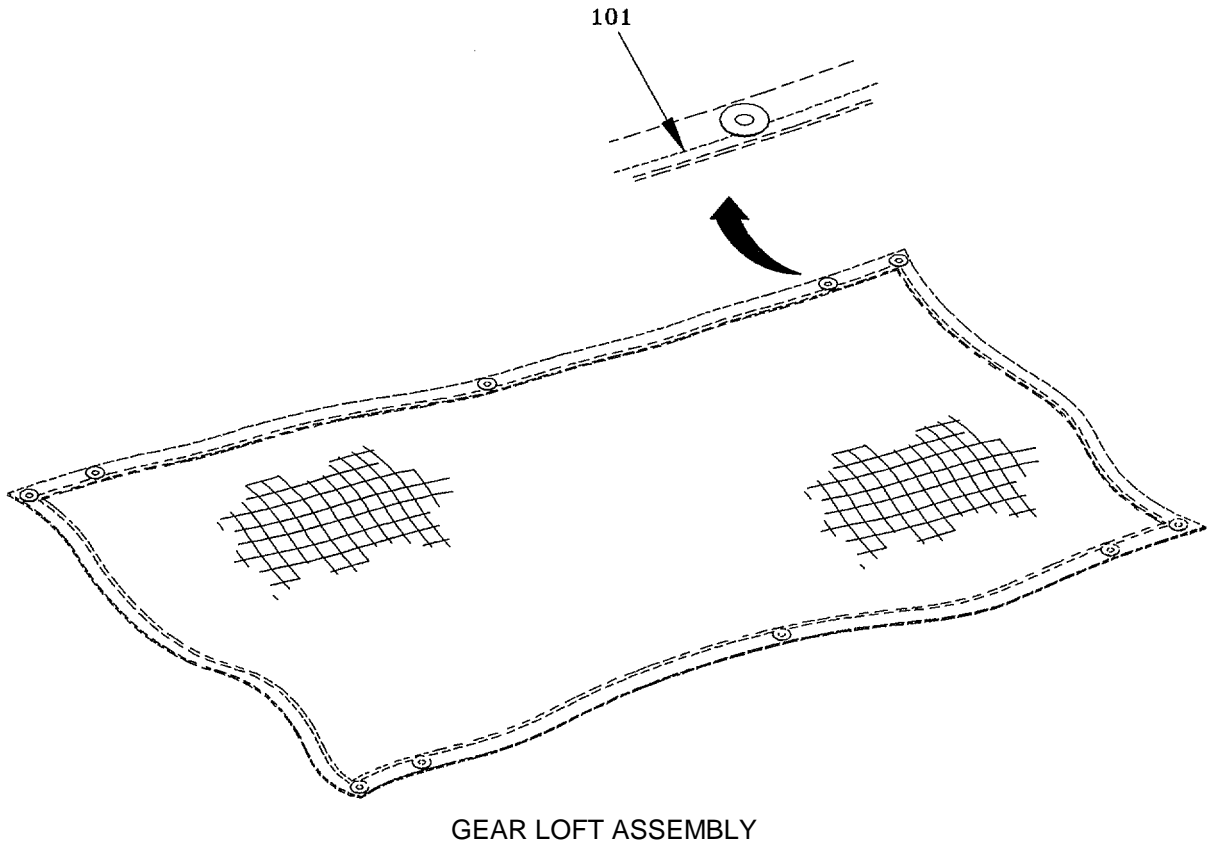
TENT BODY ASSEMBLY (Sheet 10 of 10)
